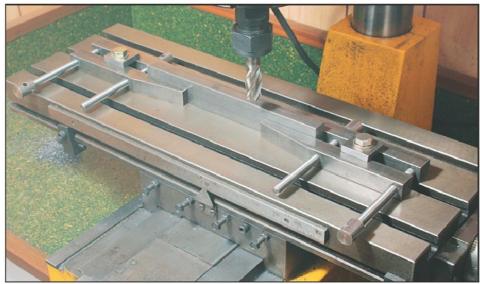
Requiring to reduce a one inch bar along its length to twenty-five millimetre, toolmaker's clamps made the top surface fully available for machining.
